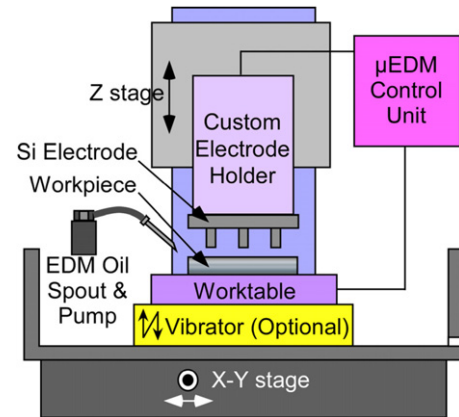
SmalTec EM203 μEDM machine adapted for batch mode micromachining of metal alloy workpiece with Si tools.
